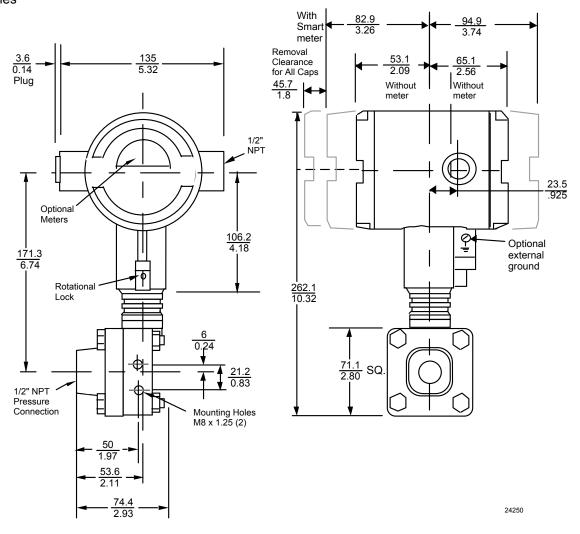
Typical mounting dimensions for reference STA922 and STA940
